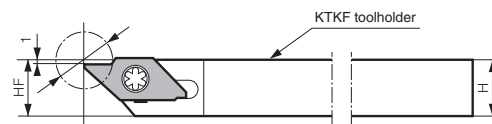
When a TKF-AS/-ASR insert is attached (The cutting edge is 1mm lower than the center line)
